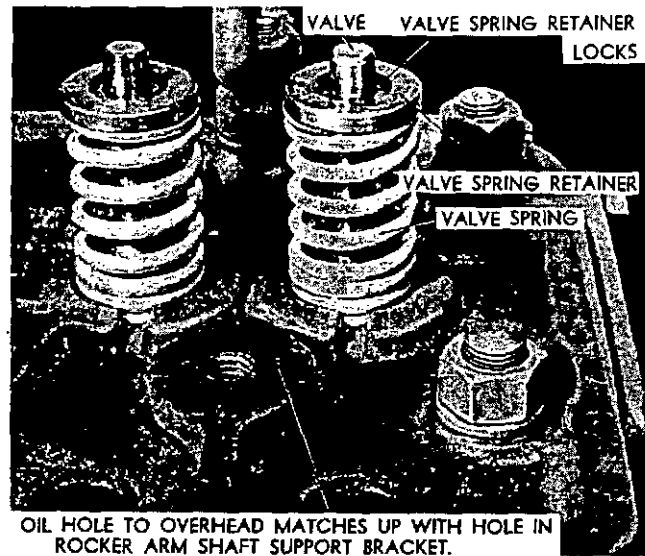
Valve Assembly (Note Close Wound Coils Contact Head)
